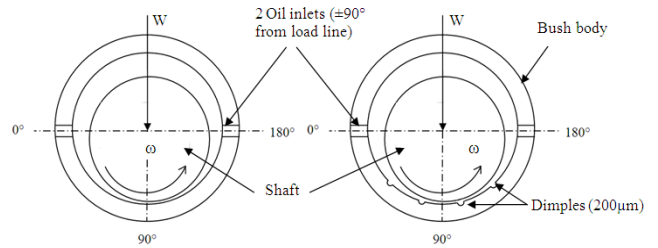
Bearing geometry (a) Smooth bearing and (b) Textured bearing
